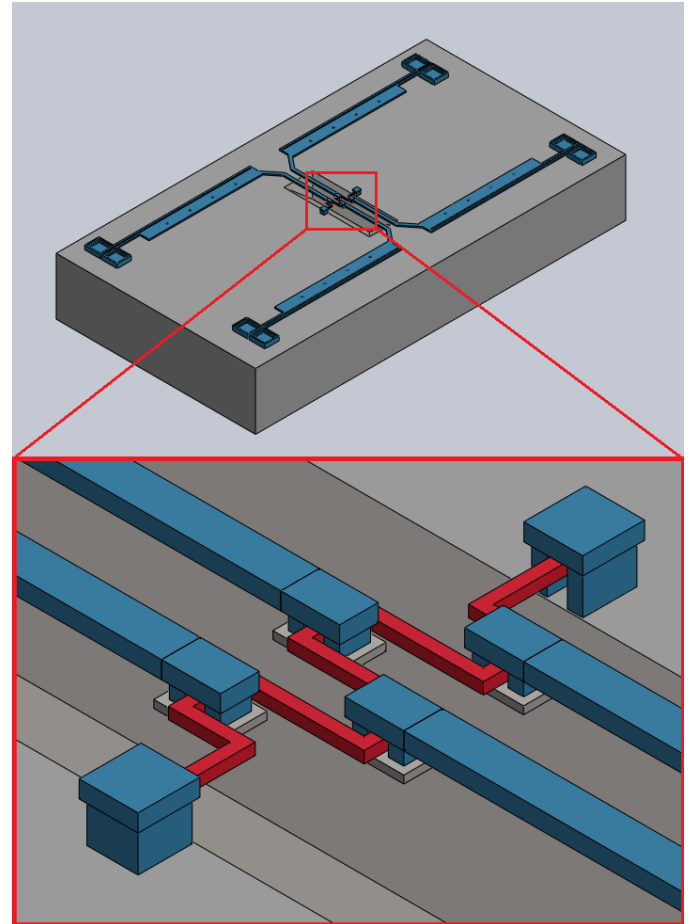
Solid model of proposed crankshaft drive. The crankshaft and bearings are shown enlarged.
